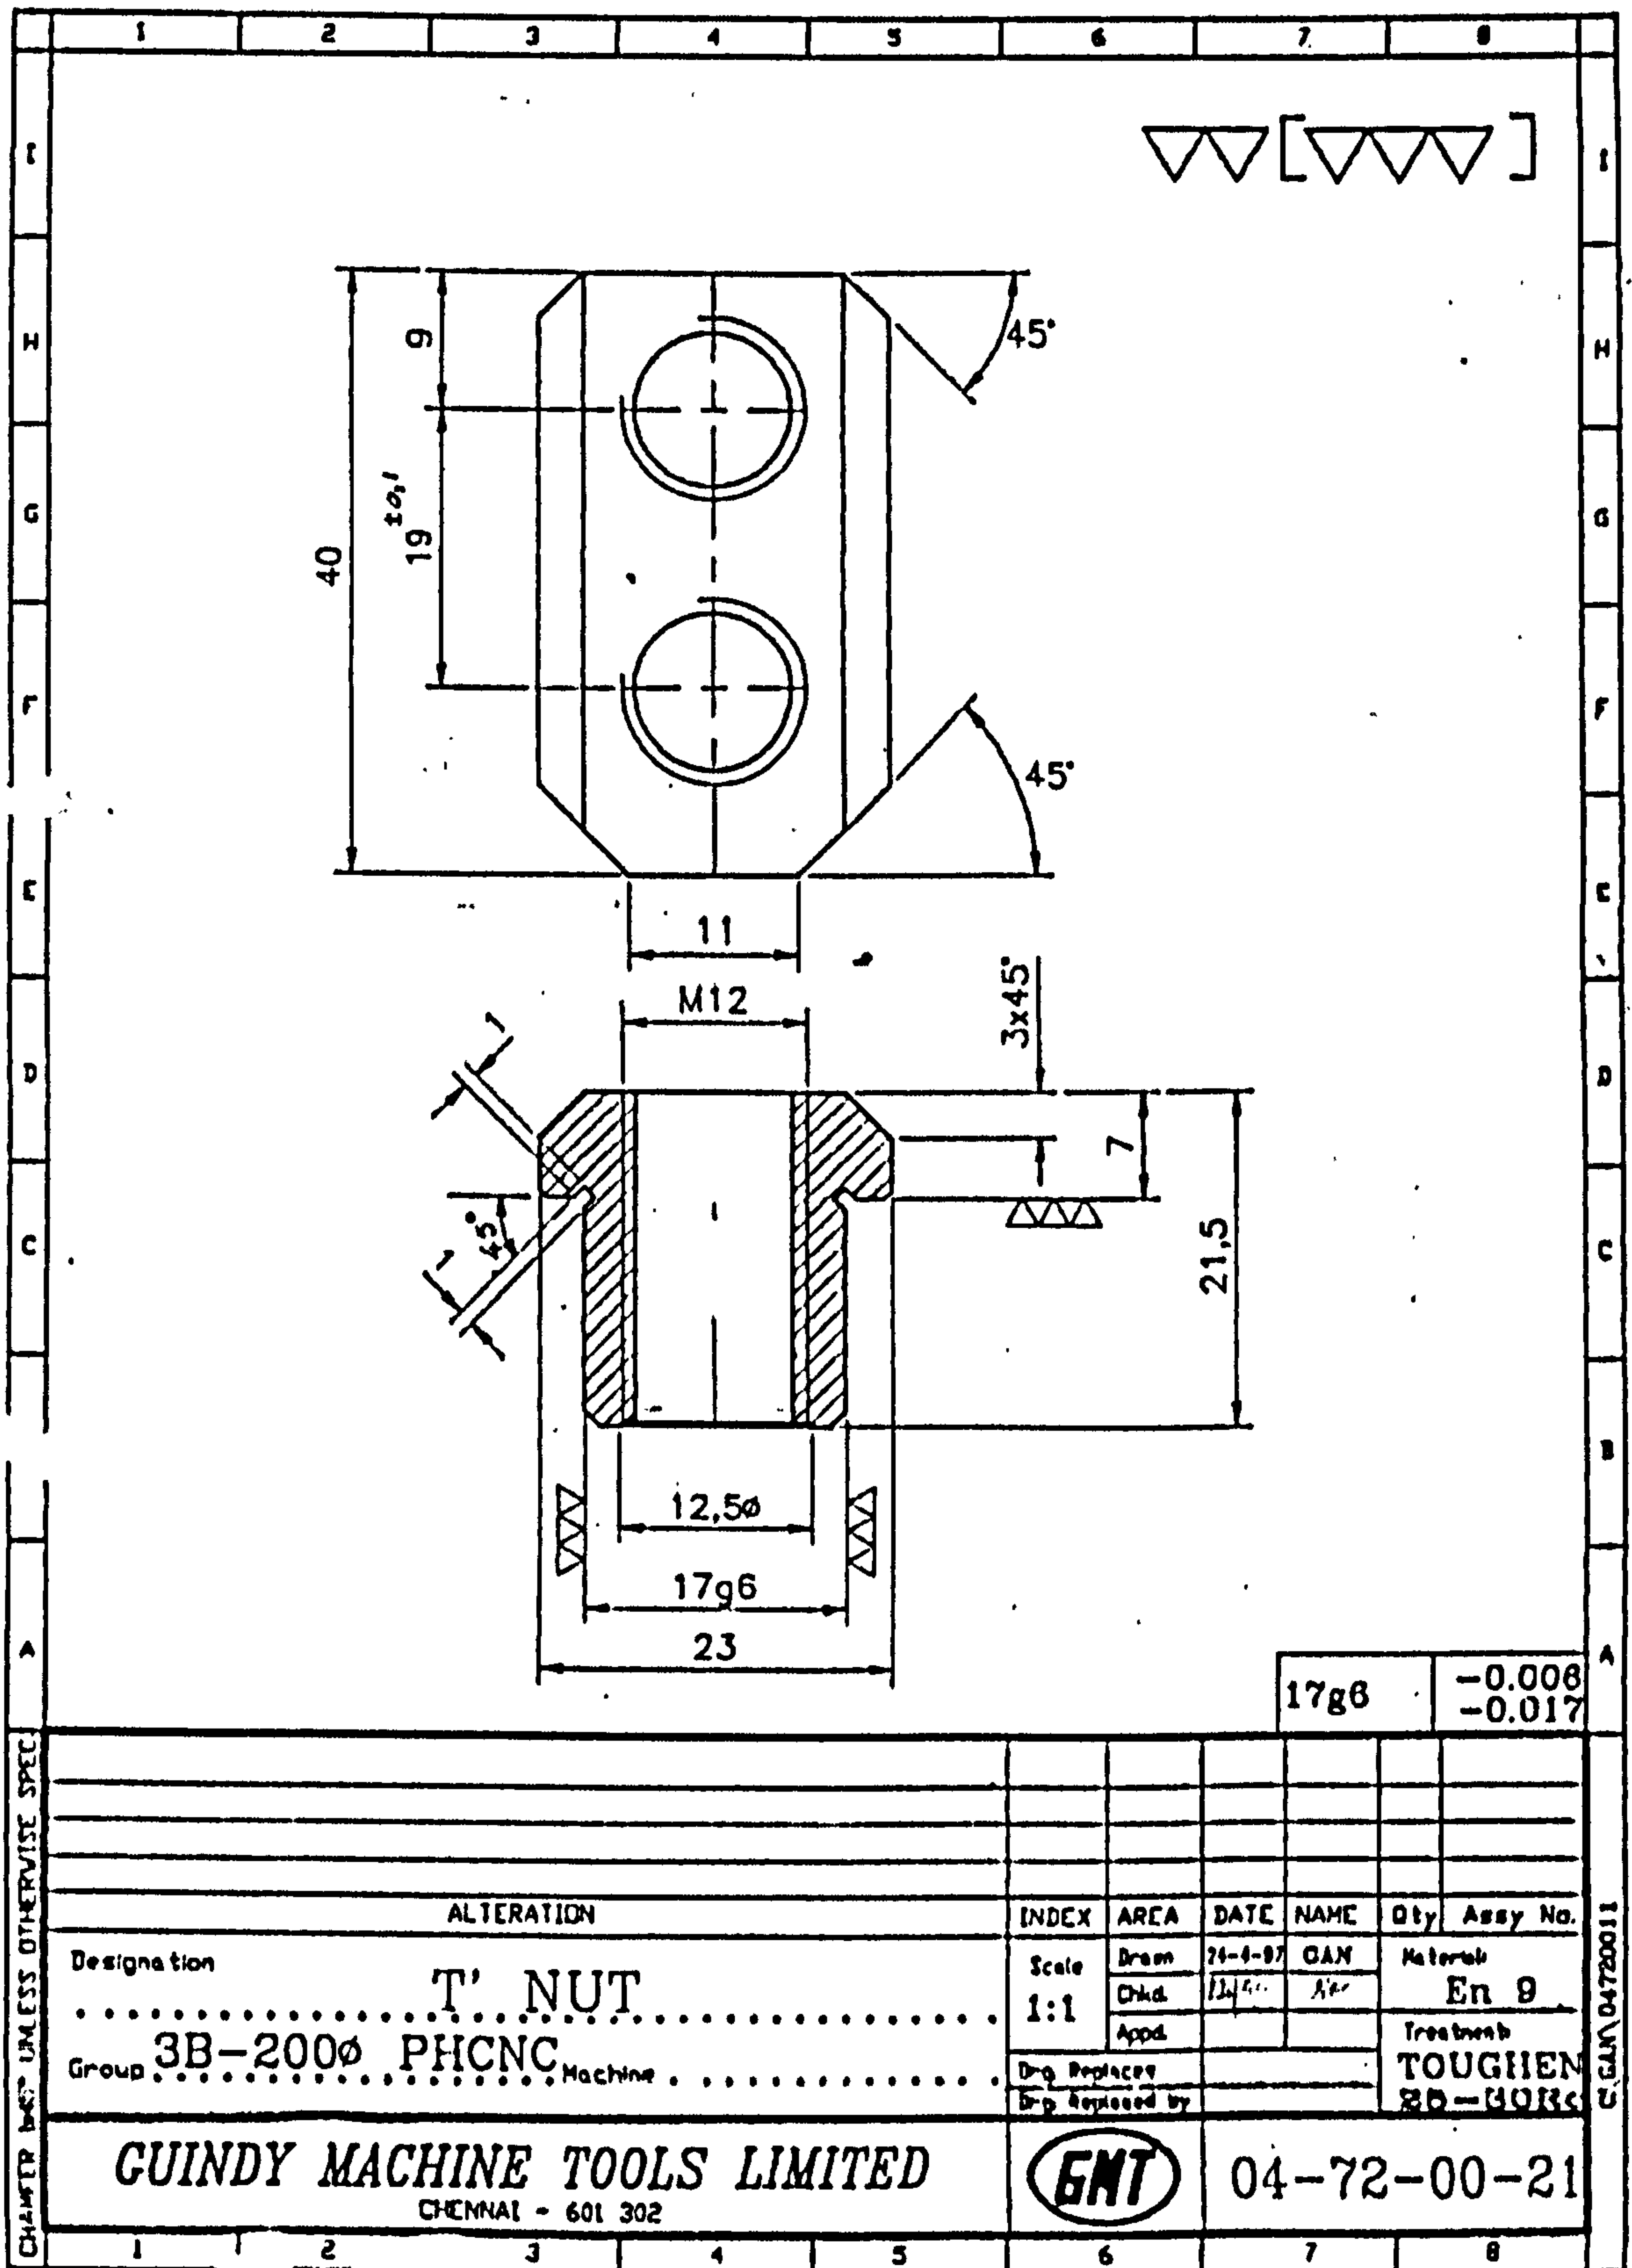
GMT Chuck T-Nut – Example Manufacturing Drawing
